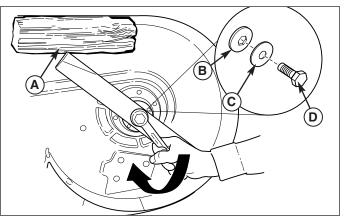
Blade Installation Mowers (44" & 50" Mowers) A. 4x4 Wood Block
